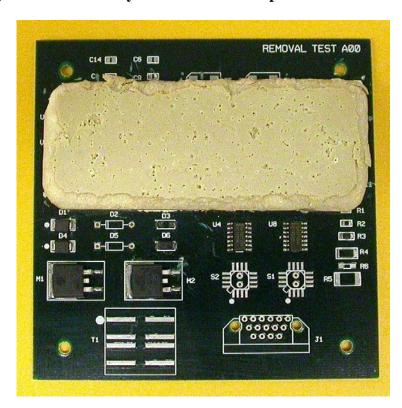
An electronic assembly that was encapsulated with a conventional encapsulant (top of assembly) and a removable encapsulant (bottom of assembly) after encapsulant removal.
